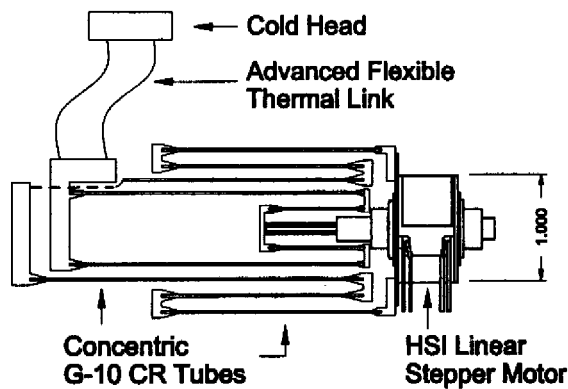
Layout of a possible linear stepper motor thermal disconnect concept.
